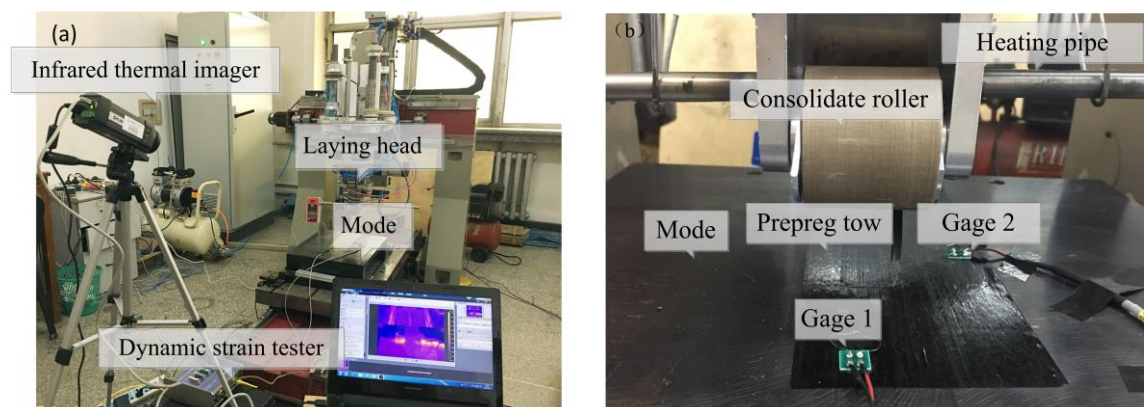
Laying stress wave test experiment platform: (a) Laboratory equipment; (b) Laying roller and foundation.
